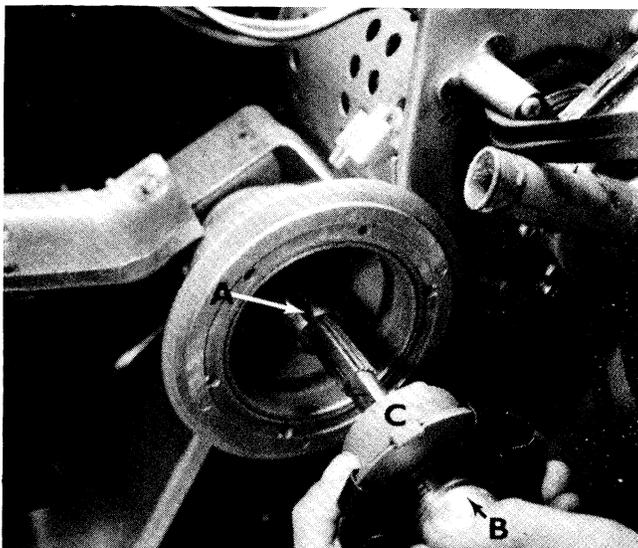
Alignment of Keyways between Brake Assembly and Mechanism Assembly Tool
